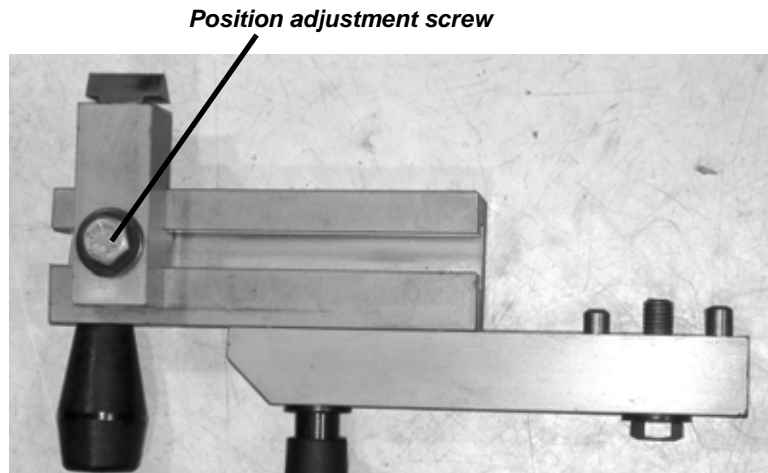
Loosen the position adjustment screw to adjust the trip radially.
